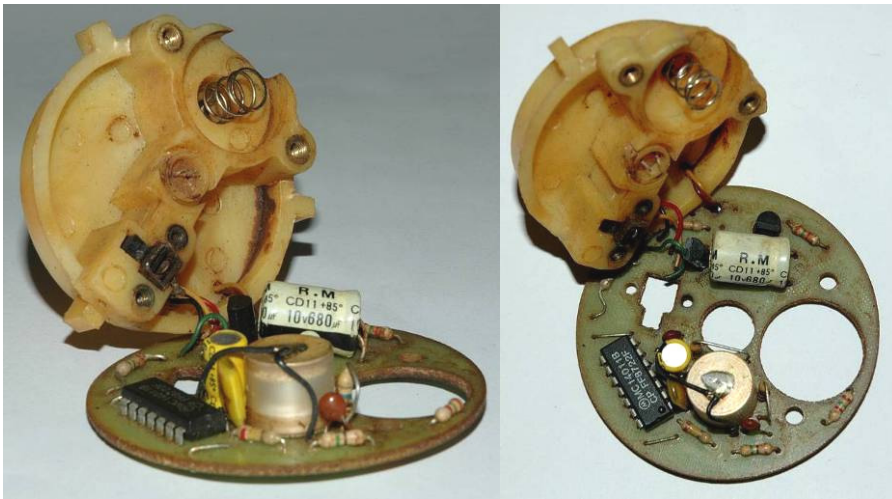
Type72b PCB component side, plastic cap removed. The tilt switch is the component with the two black wires soldered on the top. The electrolytic capacitor (10V680µF) is C1; the DET CAP.
